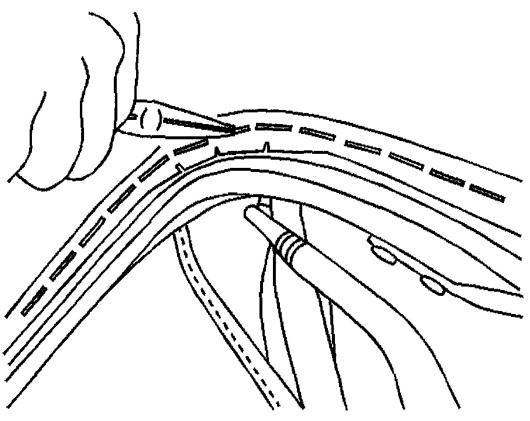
Removing Tension Cable Screw Courtesy of GENERAL MOTORS CORP.
